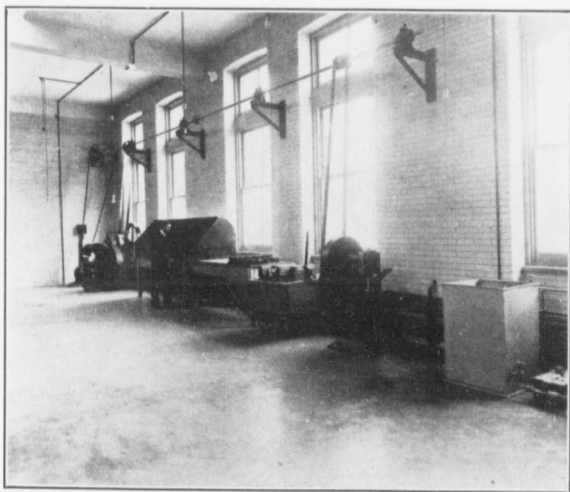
Shearing machine, rotary files, and assay cutter in Melting House.
